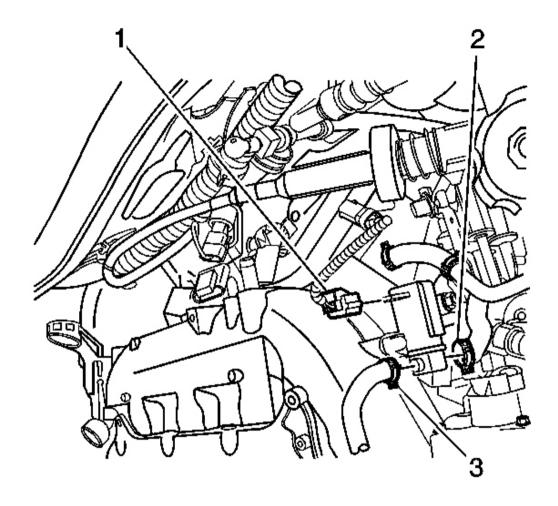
View Of Evaporative Emission (EVAP) Canister Purge Valve Courtesy of GENERAL MOTORS CORP.
